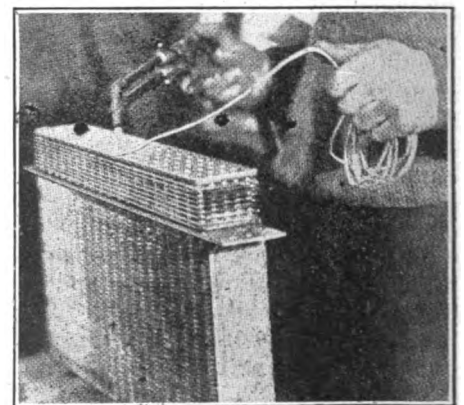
RESETTING THE TUBES IN NEW SOLDER
